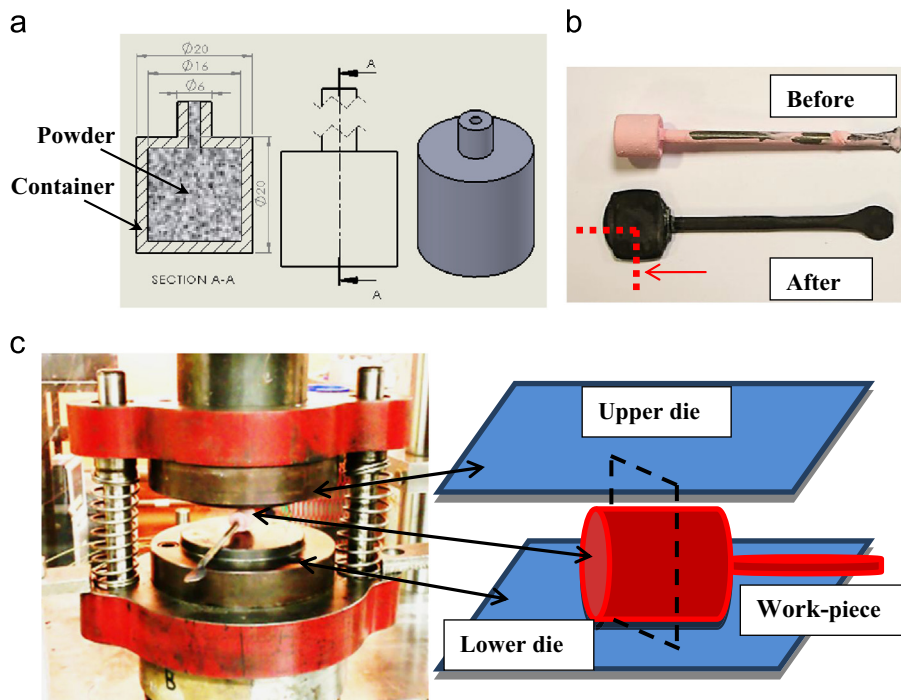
Test-piece design and test set-up for direct powder forging (a) dimensions of the container; (b) test-piece before and after the deformation; (c) test set-up.
